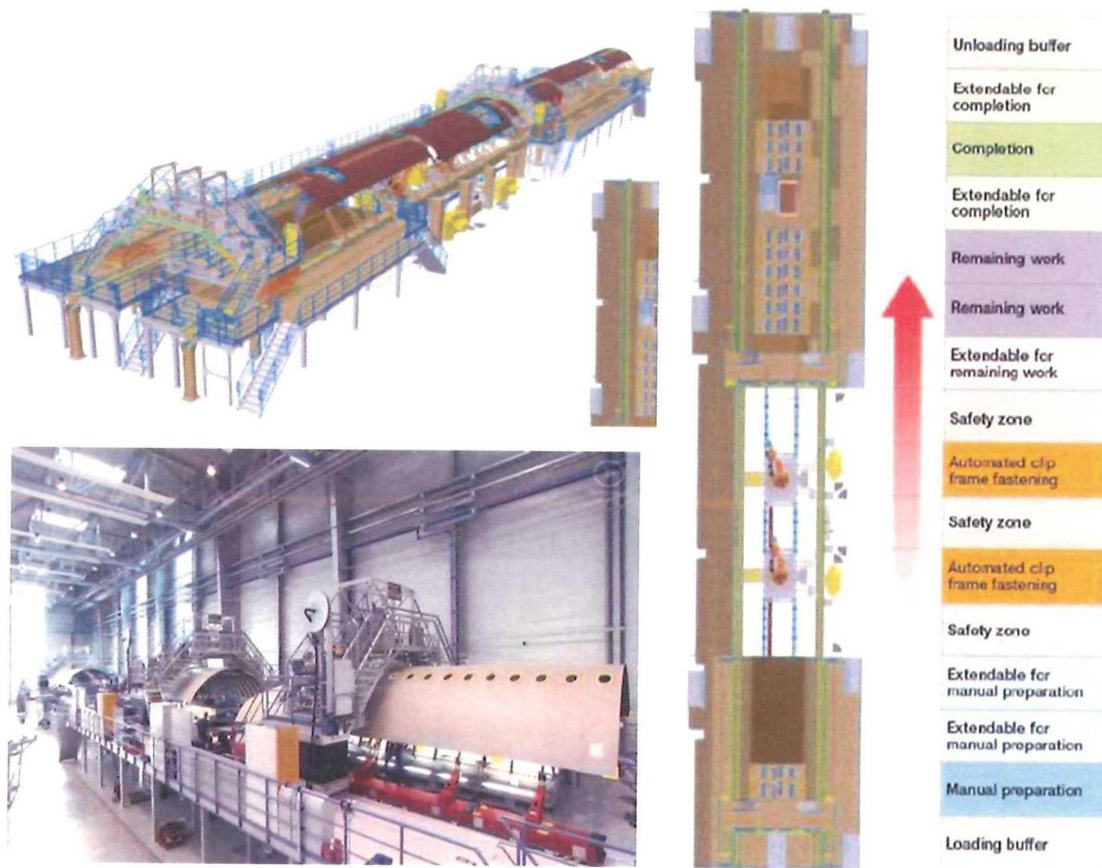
A350 fuselage panel assembly line. Frames are fastened to clips on the skin panels. The same line can be envisioned for welding of CFRTPC frames and skin panels (van Ingen, 2014).
